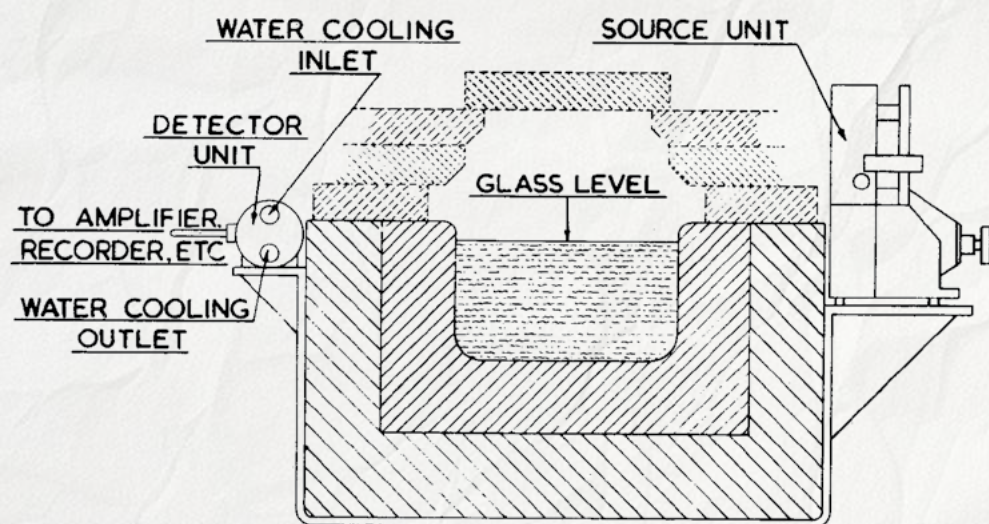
Method of mounting Source and Detector Unit on Feeder.
